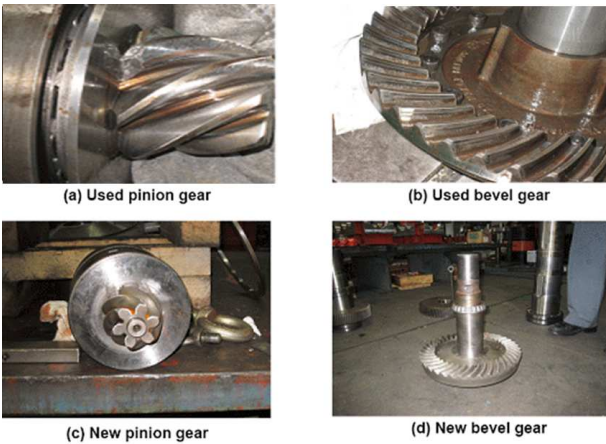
Used and new pinion gears and bevel gears of no. 4 gear reducer
